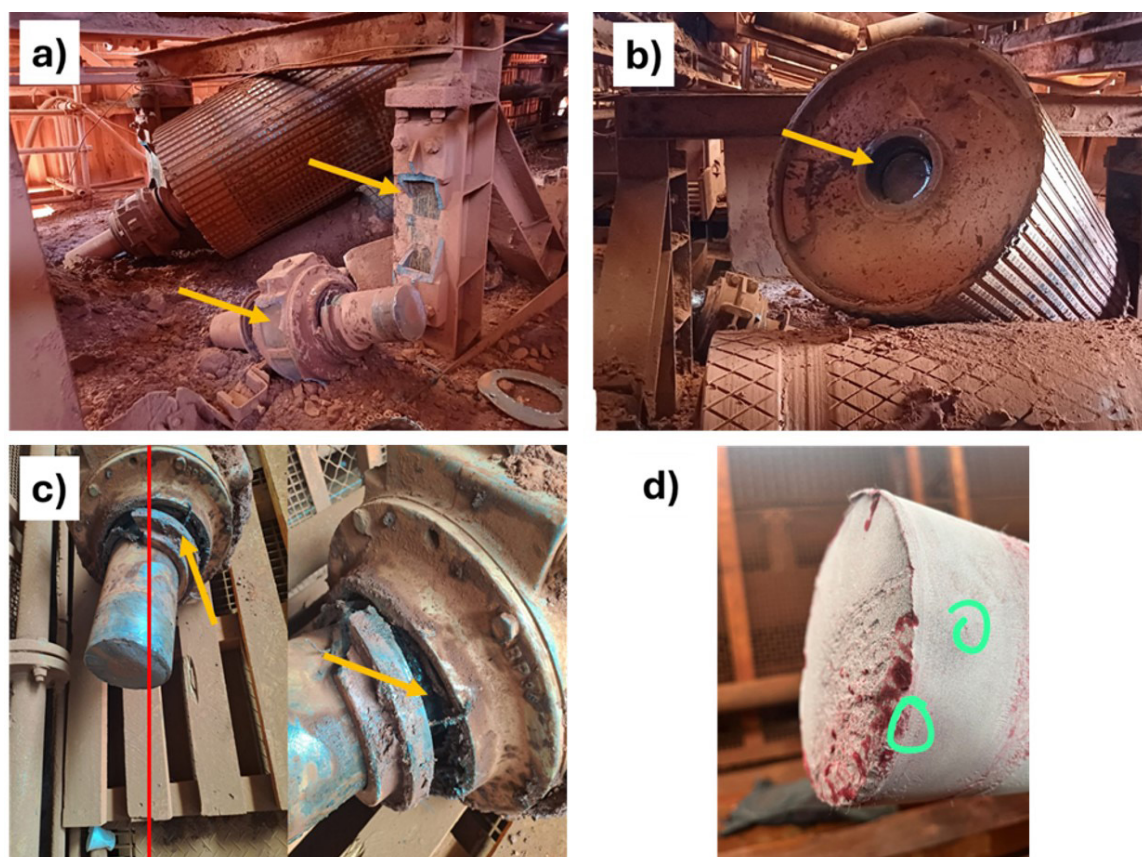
Images of the failure of a conveyor belt drum shaft, causing a production shutdown at the moment of failure. (a) Damaged assembly structure due to the failure, (b) fracture region of the shaft inside the drum, (c) damaged shaft bearing and misaligned shaft in the bearing, and (d) initial visual analysis using liquid penetrant revealing multiple potential fracture initiation points.
